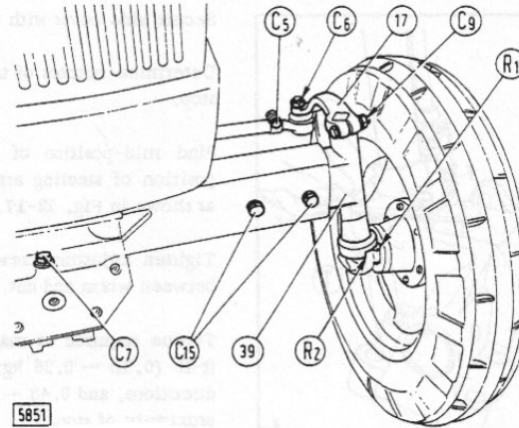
Front axle left end. (C5) Tie-rod set screw nut. (C6) Steering lever (17) ball socket blocking nut. (C7) Trunnion pin set screw. (C9) Steering lever (17) bolt nut. (C15) Beam extension (39) set screw. (R1 and R2) Steering angle adjustable and fixed stops. (17) Steering lever. (39) Beam extension.
